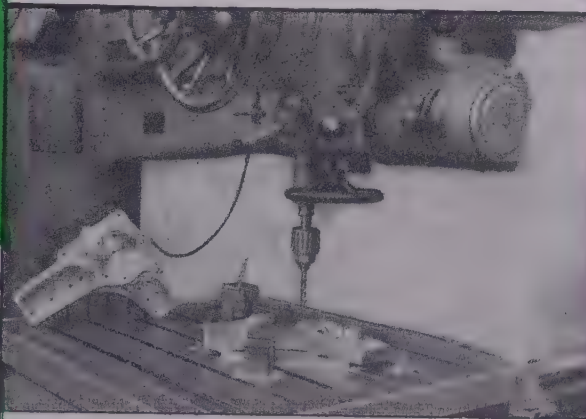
Close-up of the table, showing a typical job clamped to the surface ready for drilling. A completed component is also shown on the left of the photograph.
